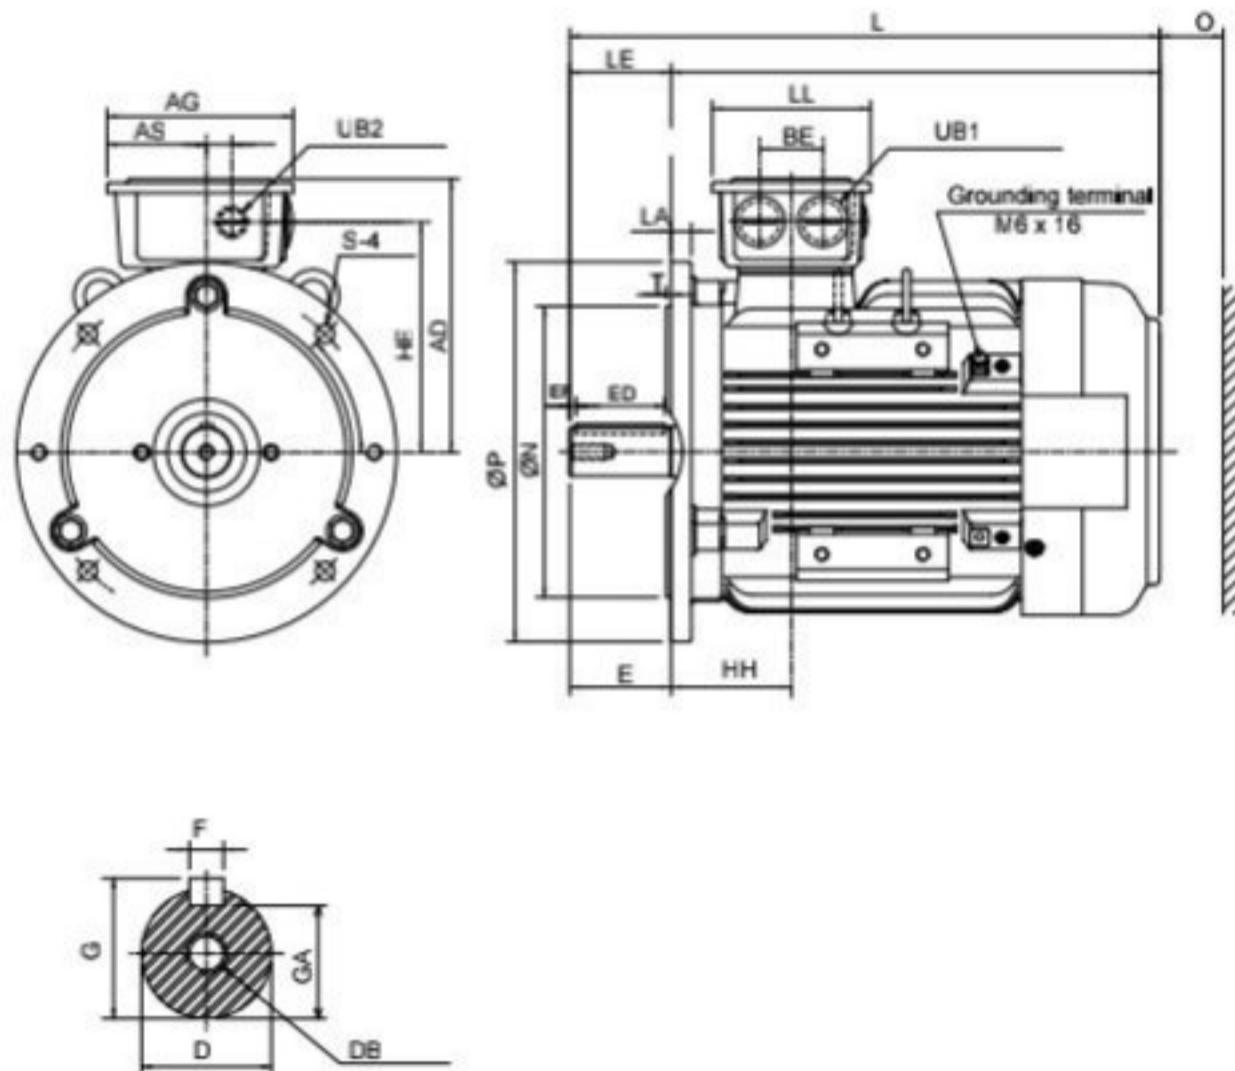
Outline drawing of cast iron design, flange version, mounting B5, frame size 160
